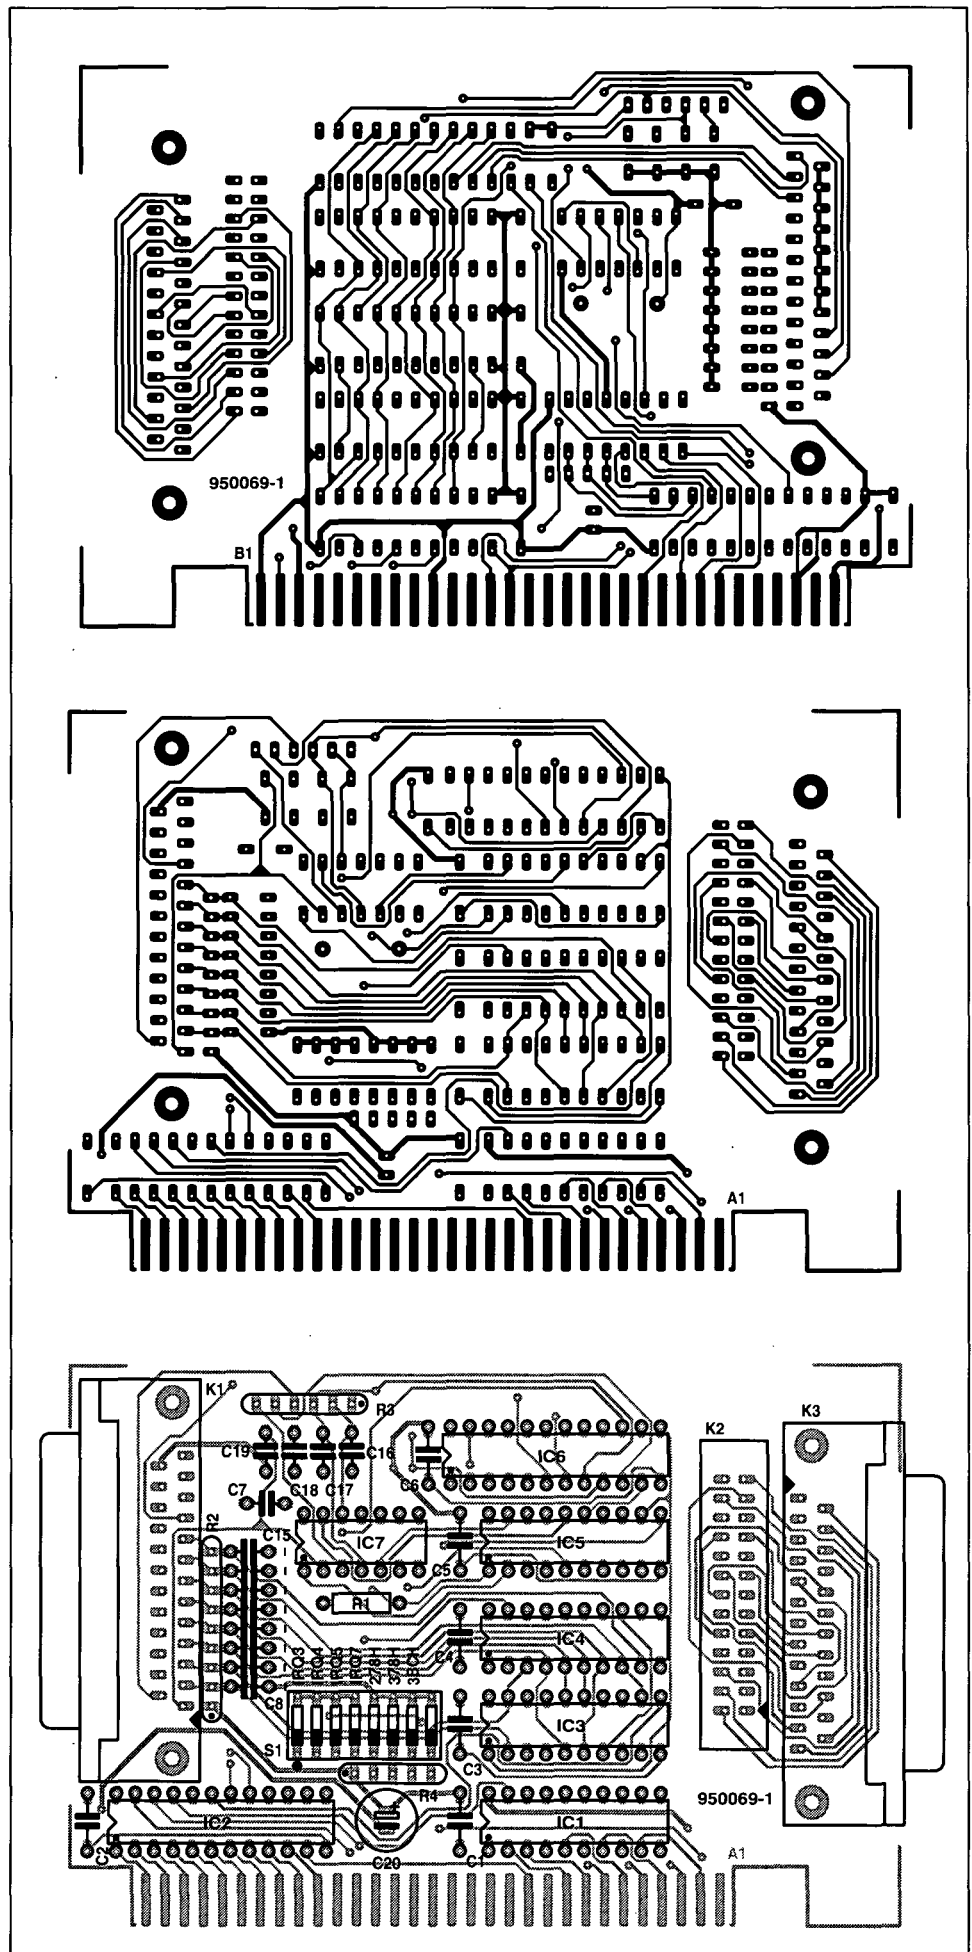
Copper layouts and component mounting plan of the double-sided through-plated printed circuit board designed for the dongle safe card (board available ready-made through the Readers Services, see page 70).
